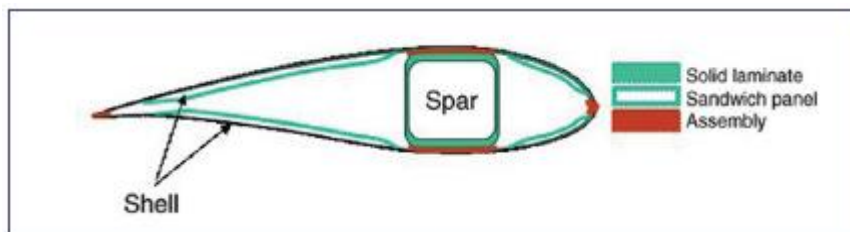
Structural layout at a typical blade section (Bir and Migliore, 2004)
